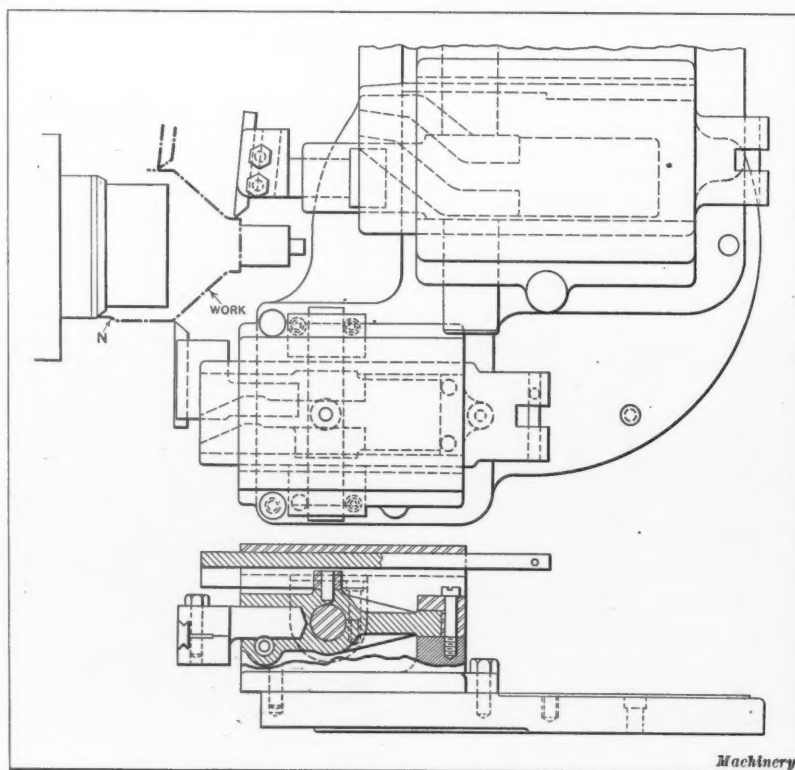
Plan and Partial Sectional Views of the Double Turning Attachment employed in machining the Outside of the Shell
